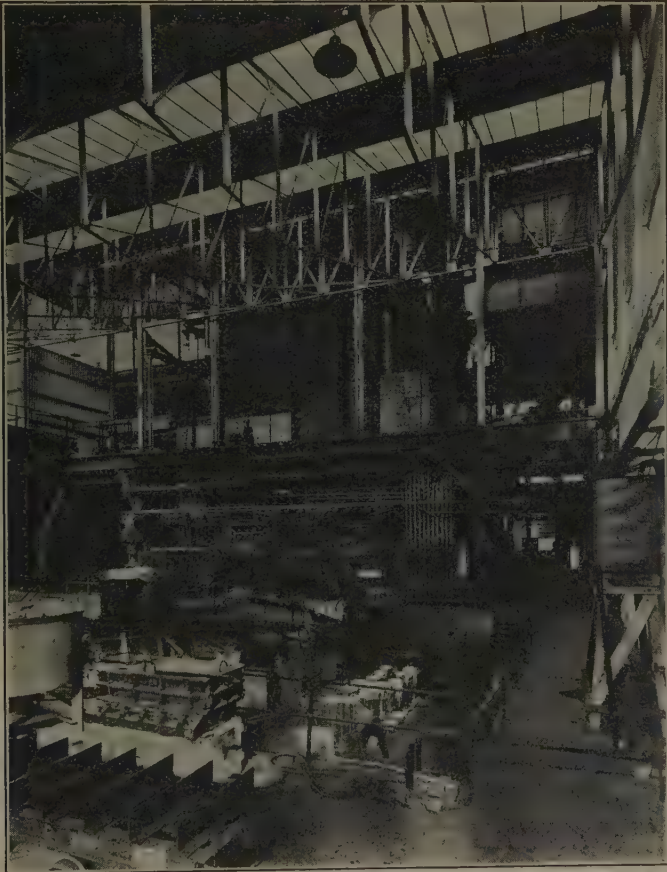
CASTING AISLE, SHOWING MOLD PRESS, FURNACE AND WASTE-HEAT BOILER.
